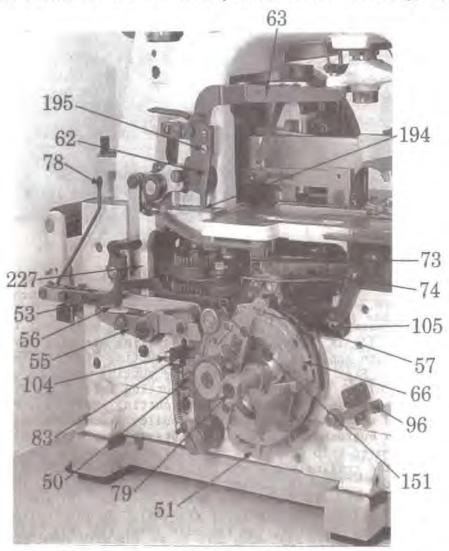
View of Pattern Wheel and Sewing Mechanism
